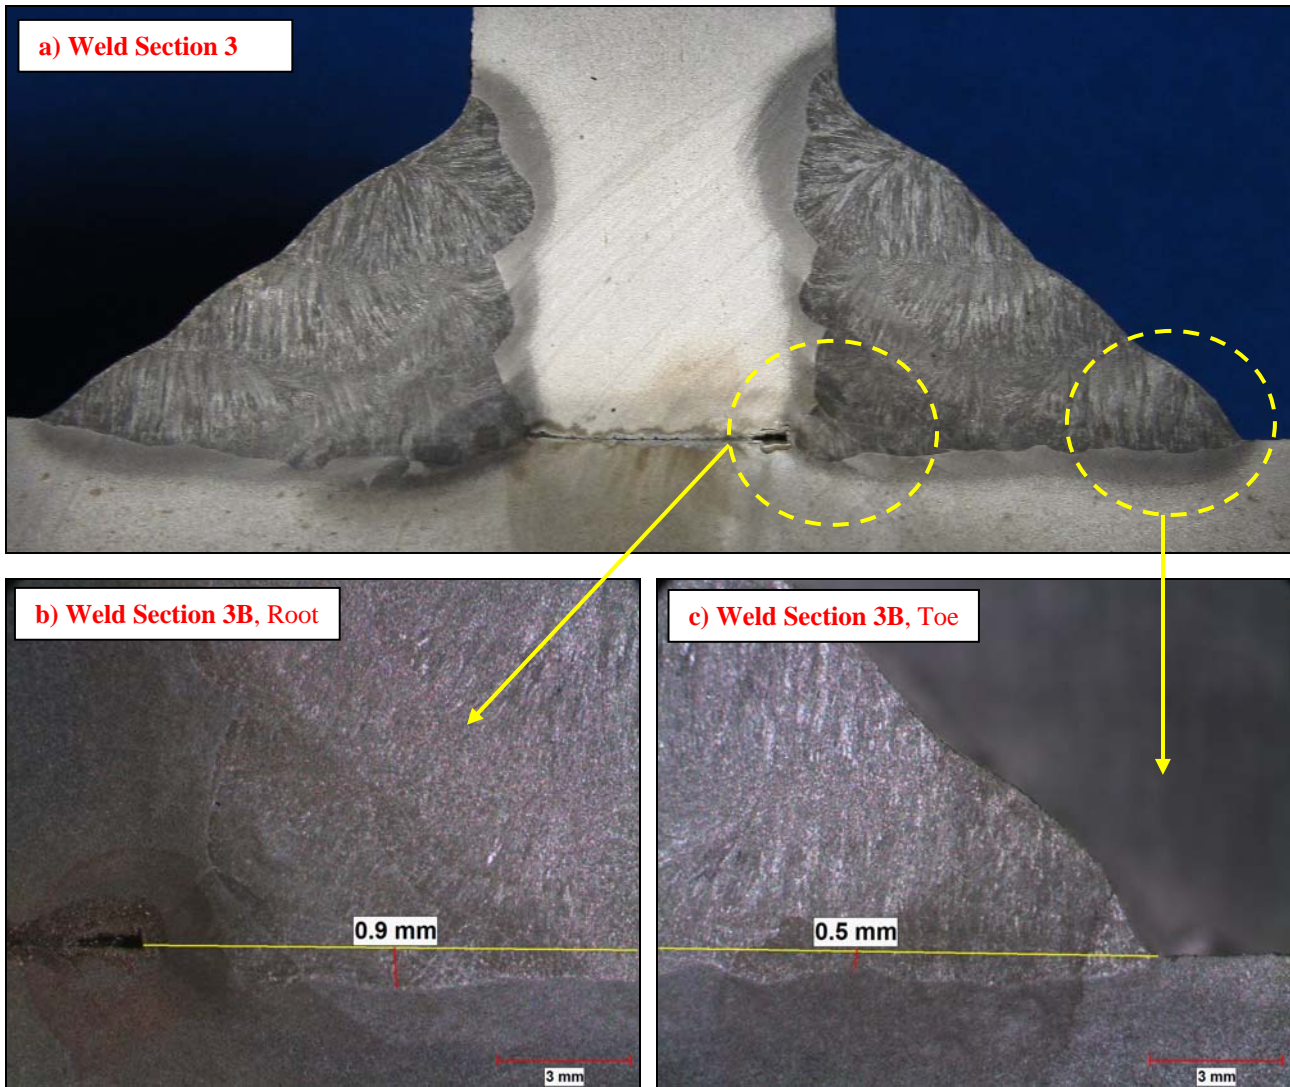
Photograph displaying three weld sections submitted for metallurgical weld evaluation.
